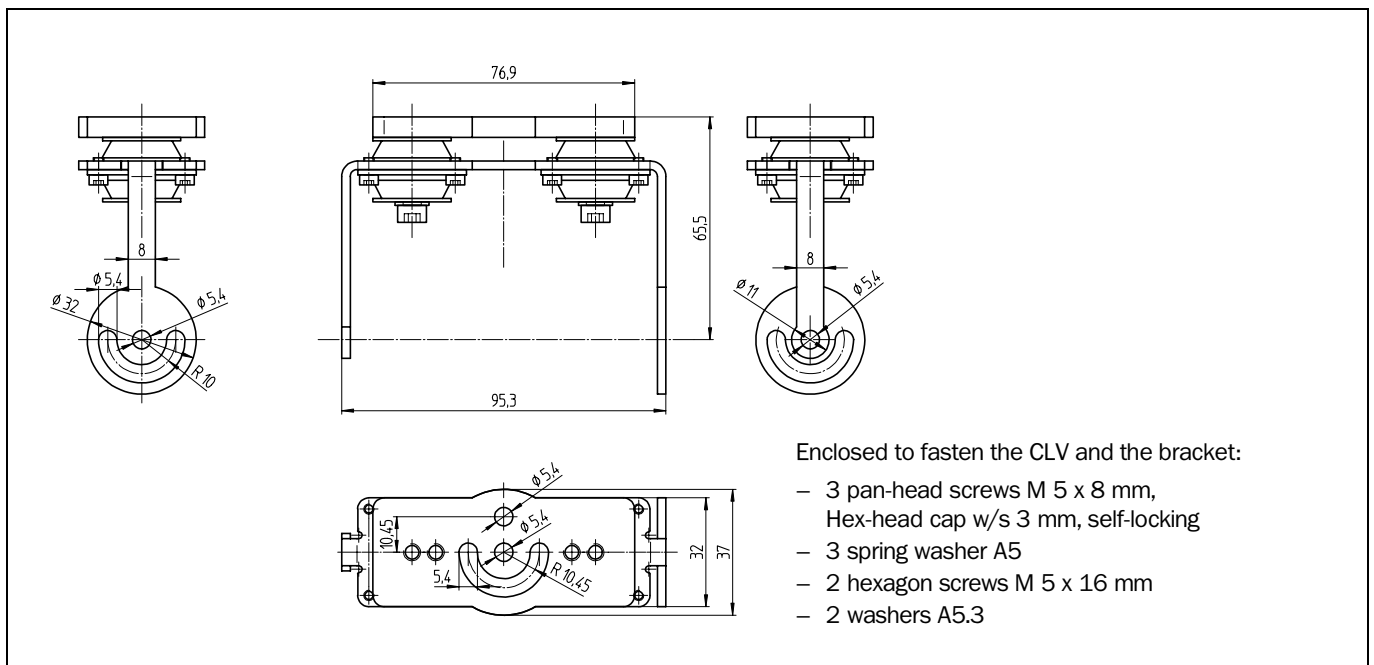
Dimensions of the mounting bracket with vibration damper No. 2 031 342
